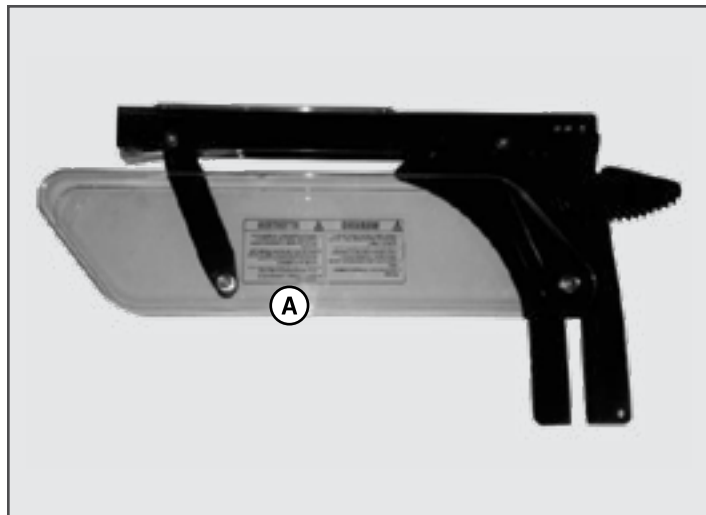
BLADE GUARD/RIVING KNIFE ASSEMBLY
